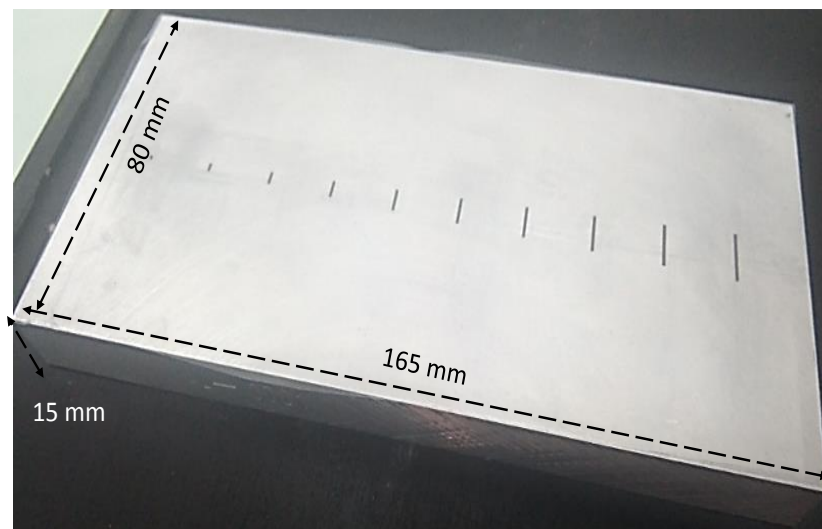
Standard Aluminum Alloy with machined flaws.
